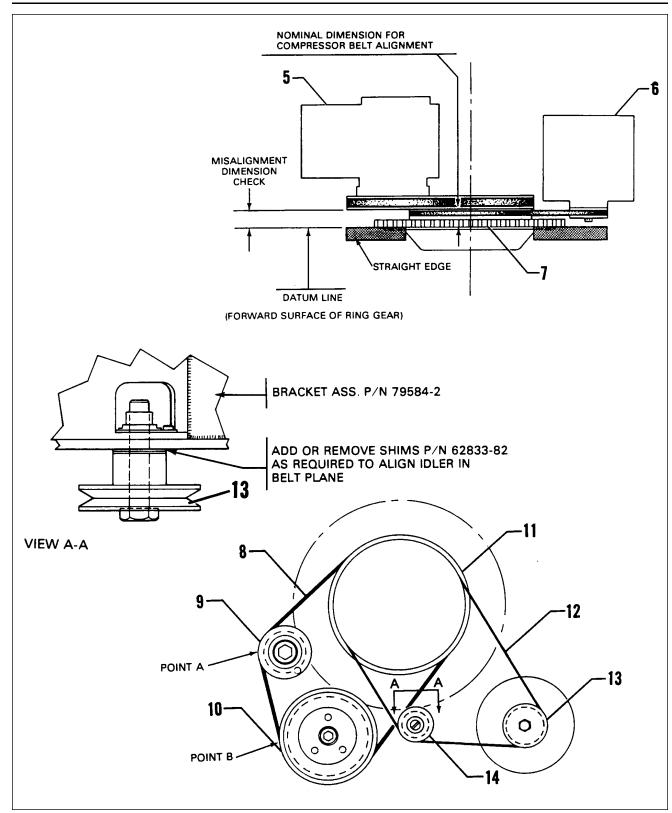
Compressor and Alternator Belt Installation (Sheet 2 of 2)
